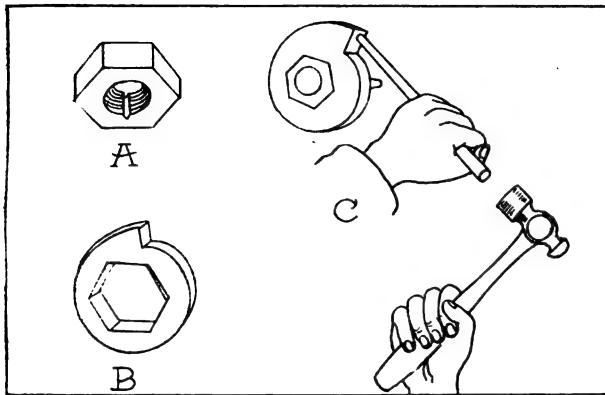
A, Nut Threads Cut to Form a Die; Handy Spanner to Use for Starting Nuts and Bolts; C, Method of Using the Spanner.
